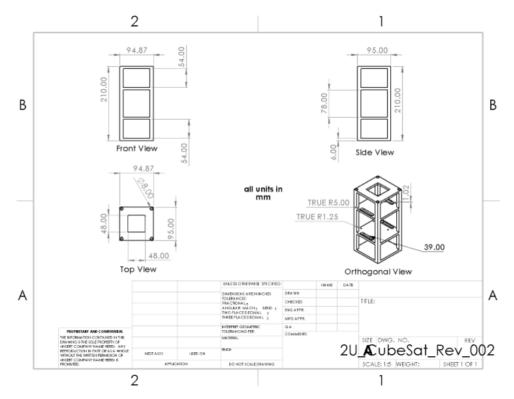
Subframe REV-002 Engineering Drawing
